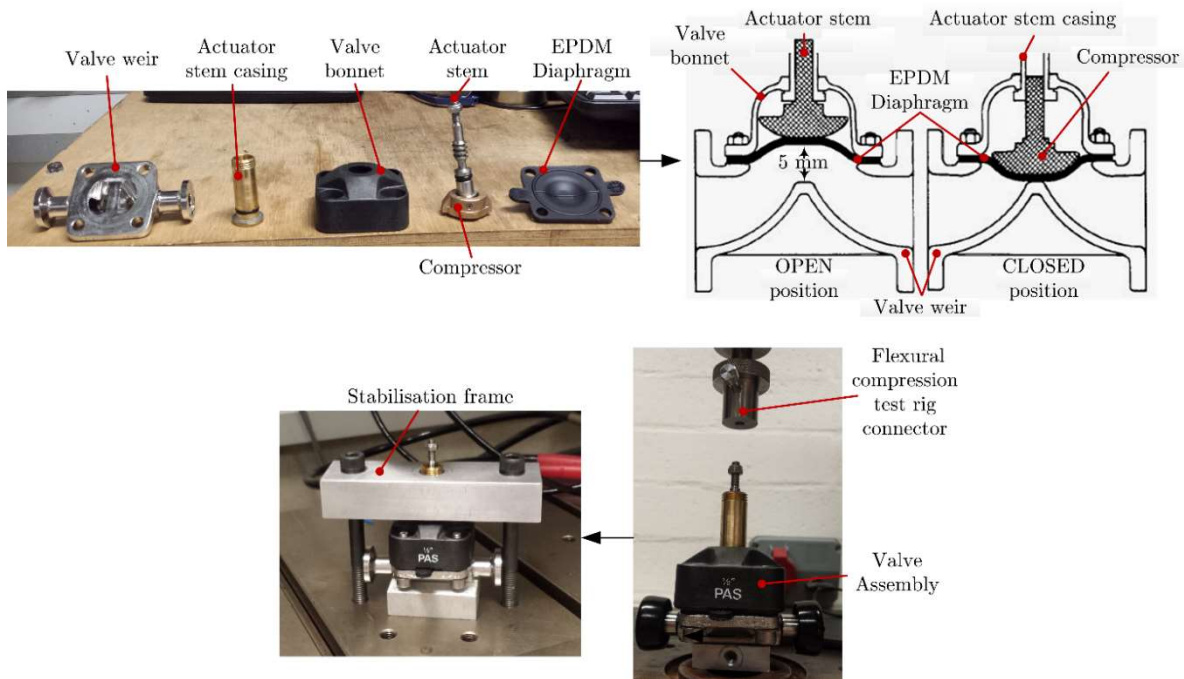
Valve assembly flexural test setup. Adapted from [308]
